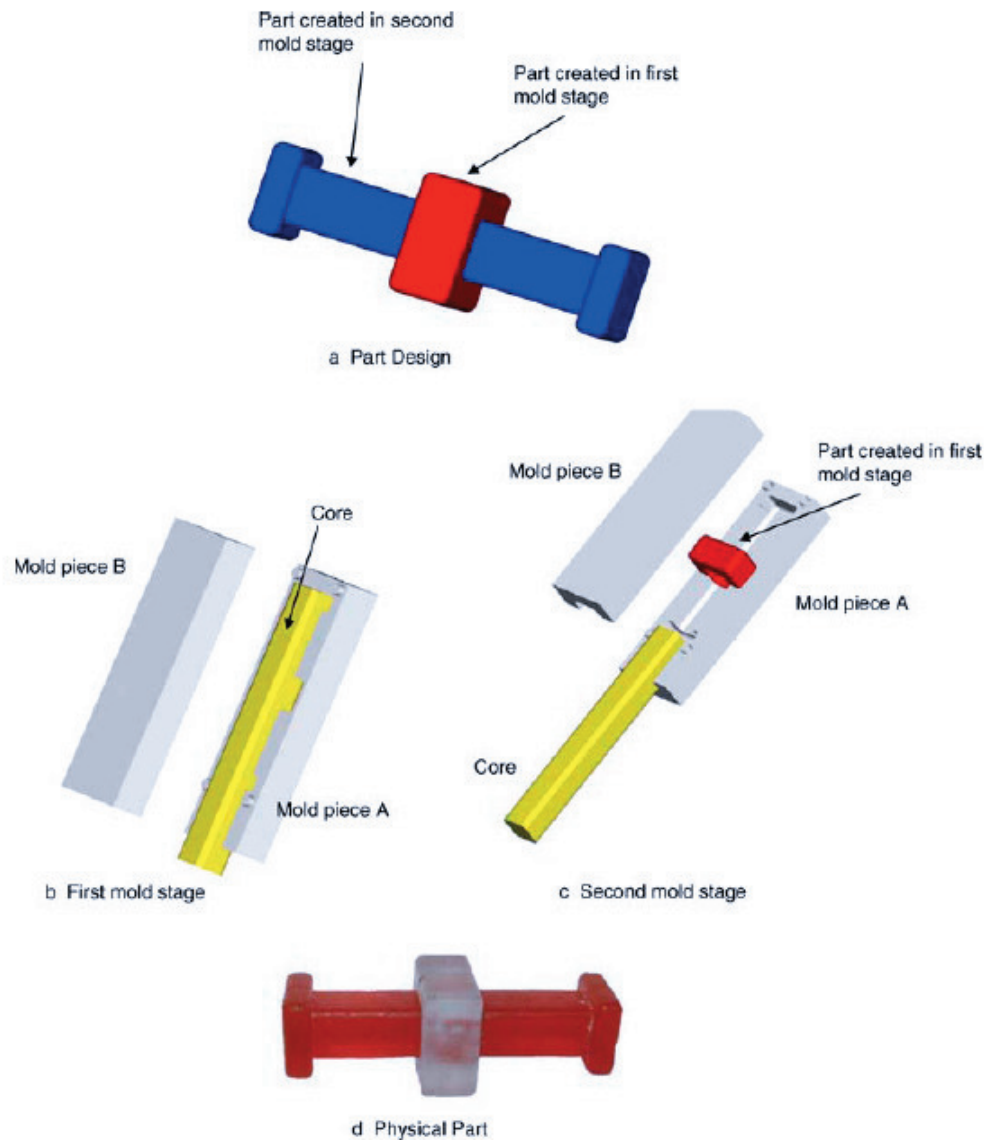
Mold design template for in-mold assembly of a prismatic joint [8]
